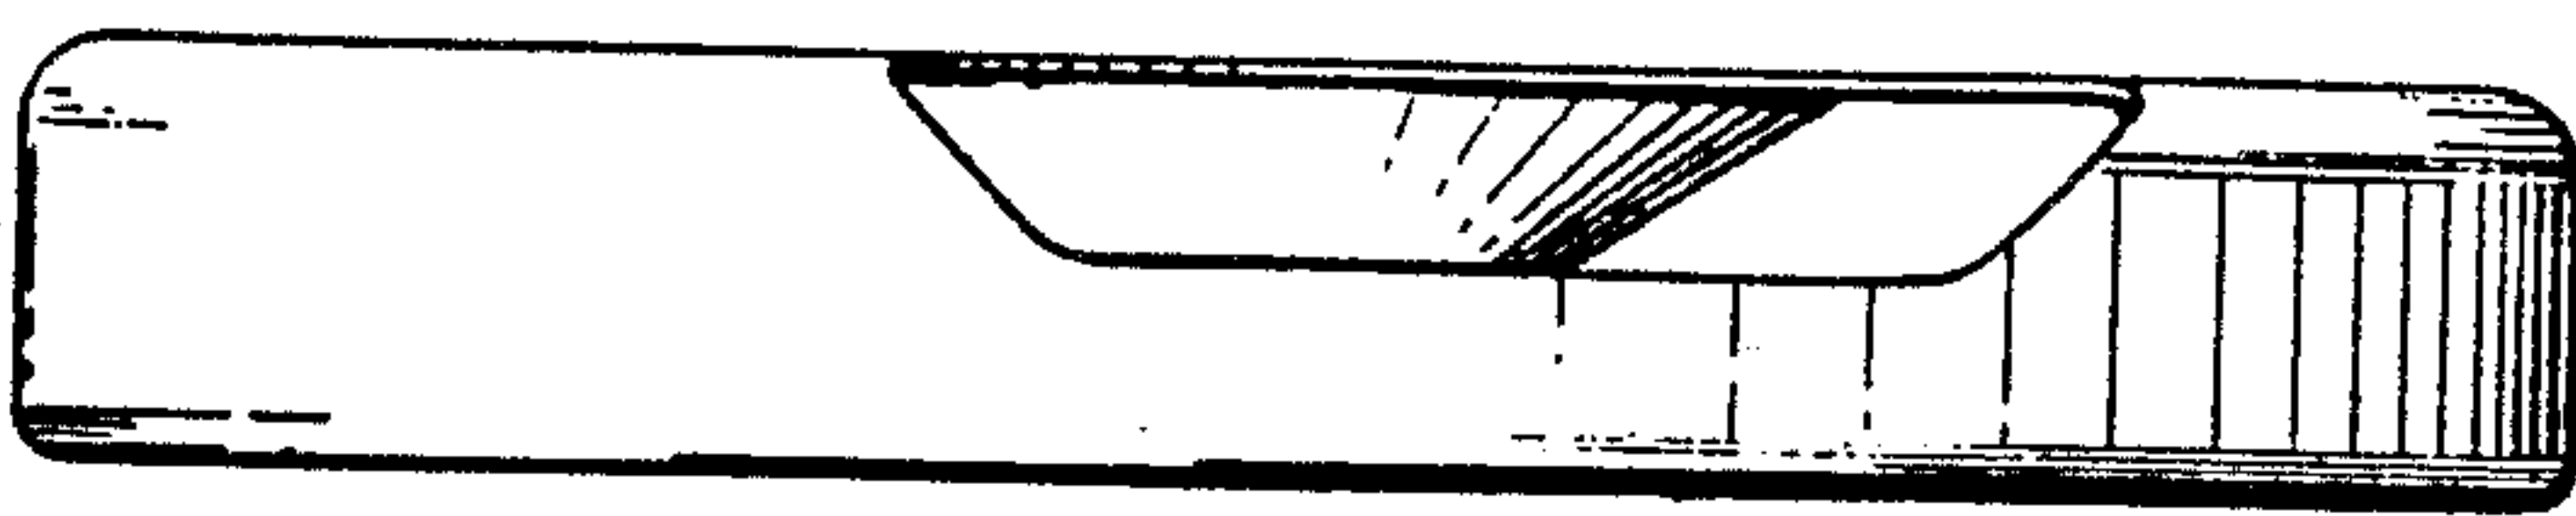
is a bottom plan view of the embodiment shown in FIG. 5.
